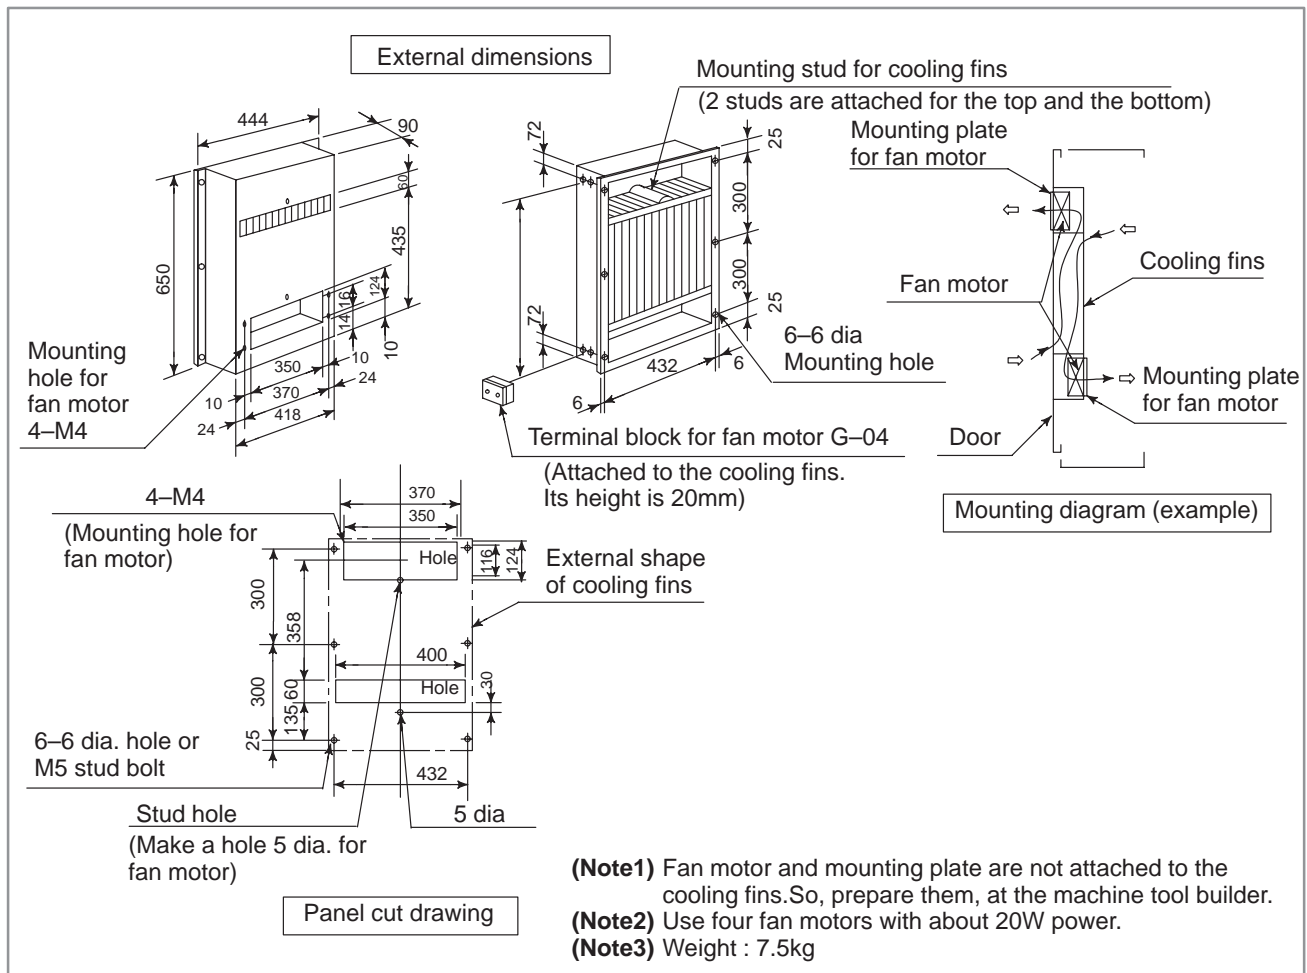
(c) External dimension and mounting method of cooling fin B (A02B-0053-K304)
